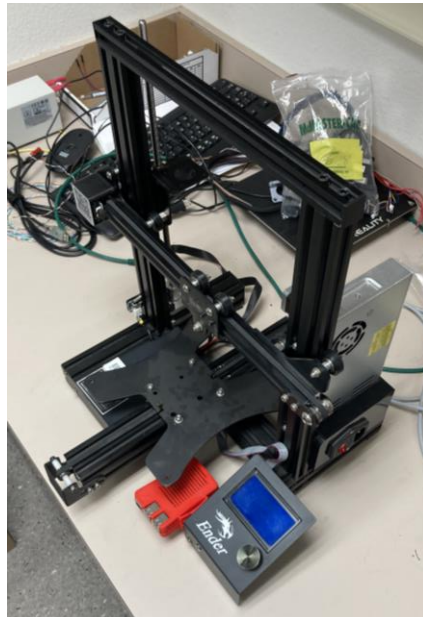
Picture showing 3D printer disassembled with all unnecessary hardware removed
